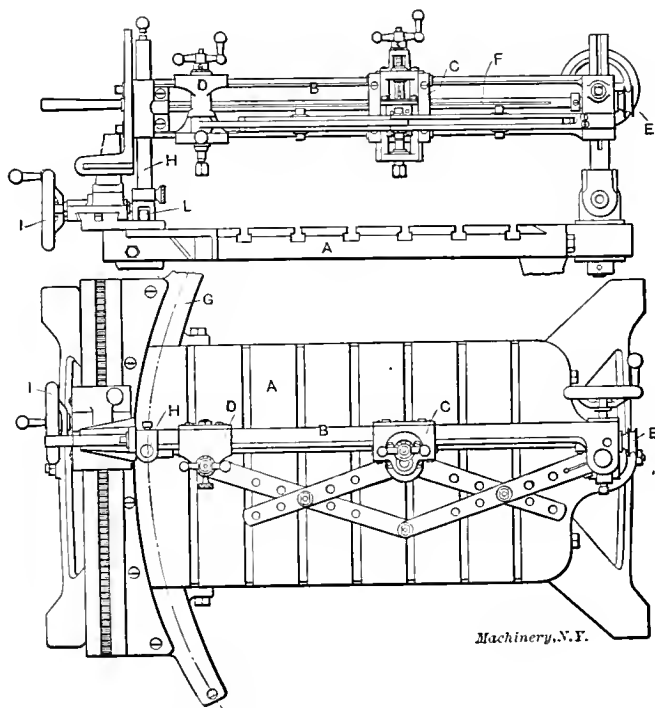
27-inch Die-sinking and Engraving Machine.
